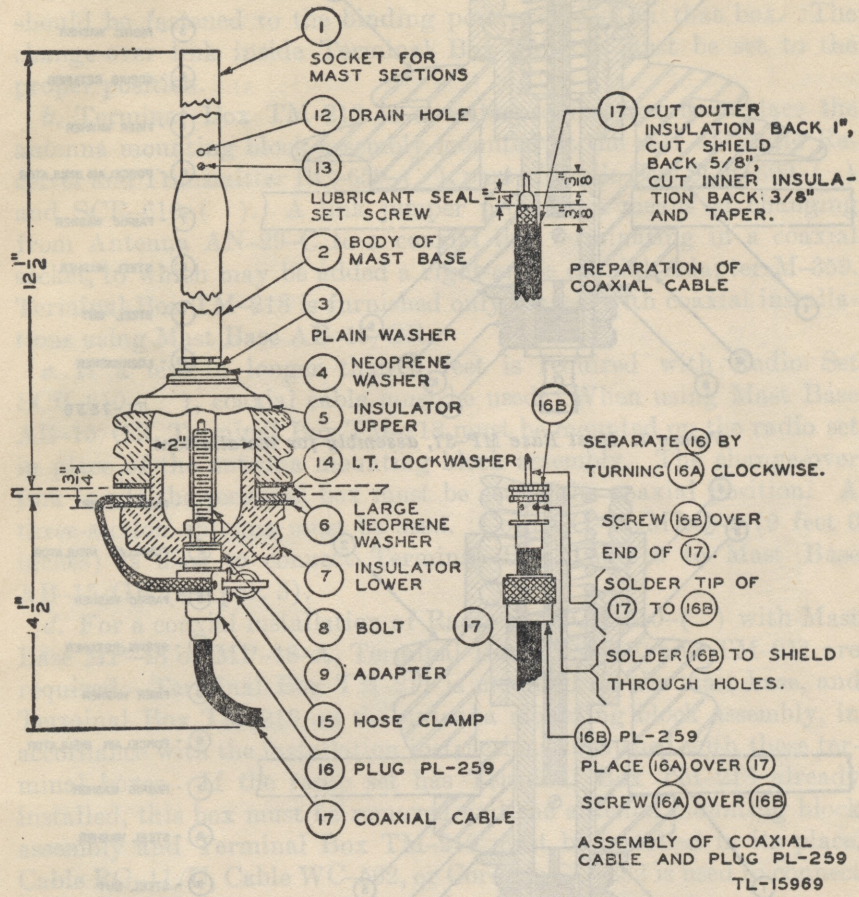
Mast Base AB-15/GR, assembly with coaxial lead-in.
